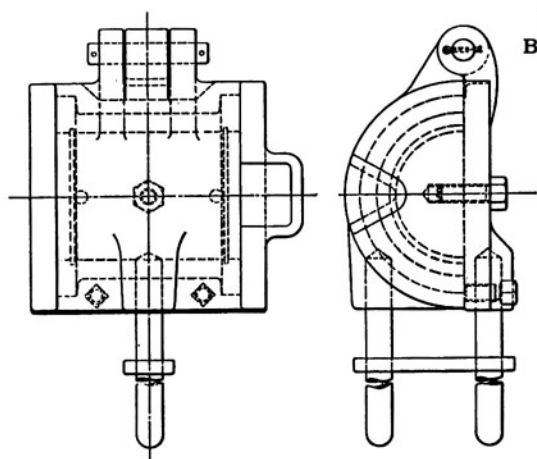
Mold in which Babbitt Spindle Bearings are made
